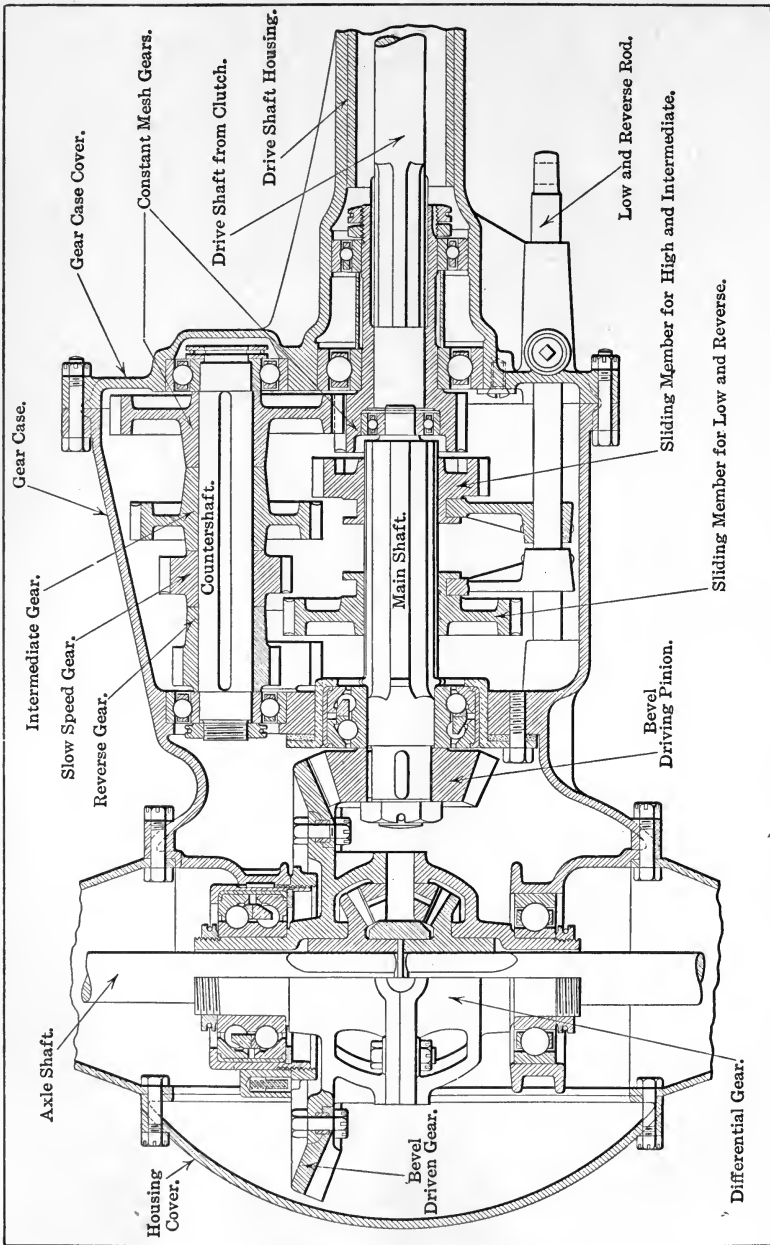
Usual Arrangement of Change Speed and Driving Gearing at Differential Housing of Live Rear Axle or Countershaft.
